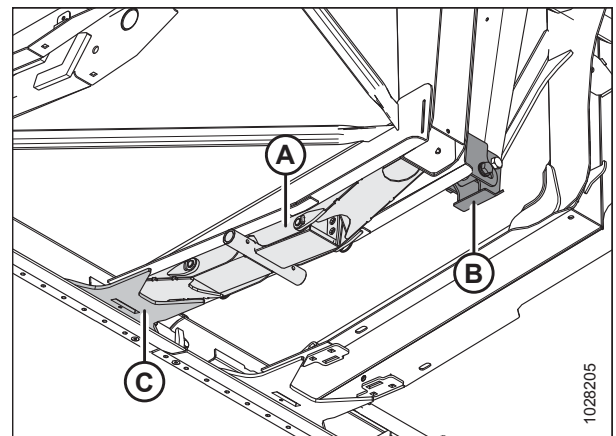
Inboard Arm Assembly Installed in Left Header Leg – View from Below
